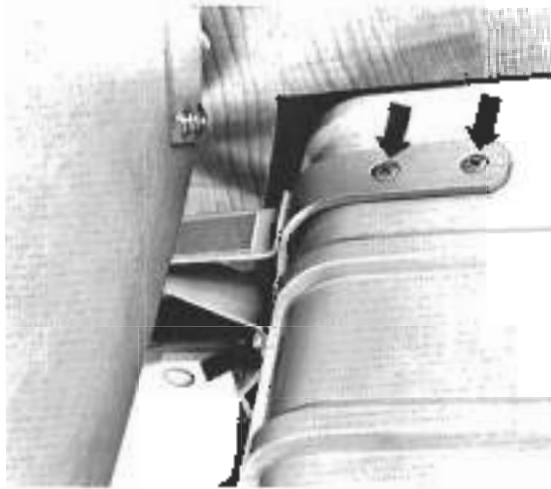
Screws and bolt (arrows) that hold the right-hand bracket.
